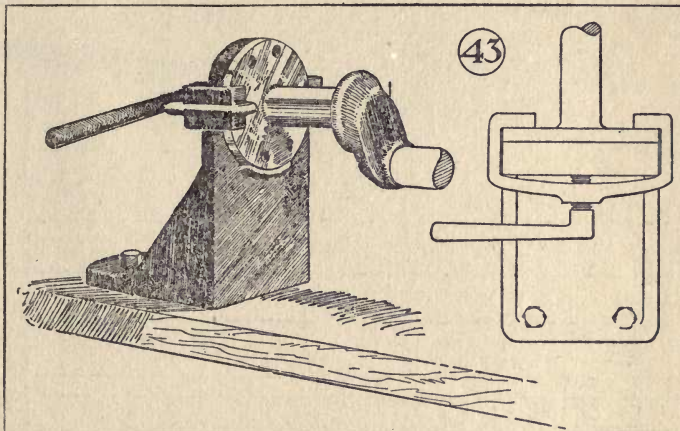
This is a clamp for holding the crankshaft while polishing the cranks preparatory to fitting the bearings. It obviates the necessity of using an ordinary vise and makes the shaft rigid and convenient to work on
